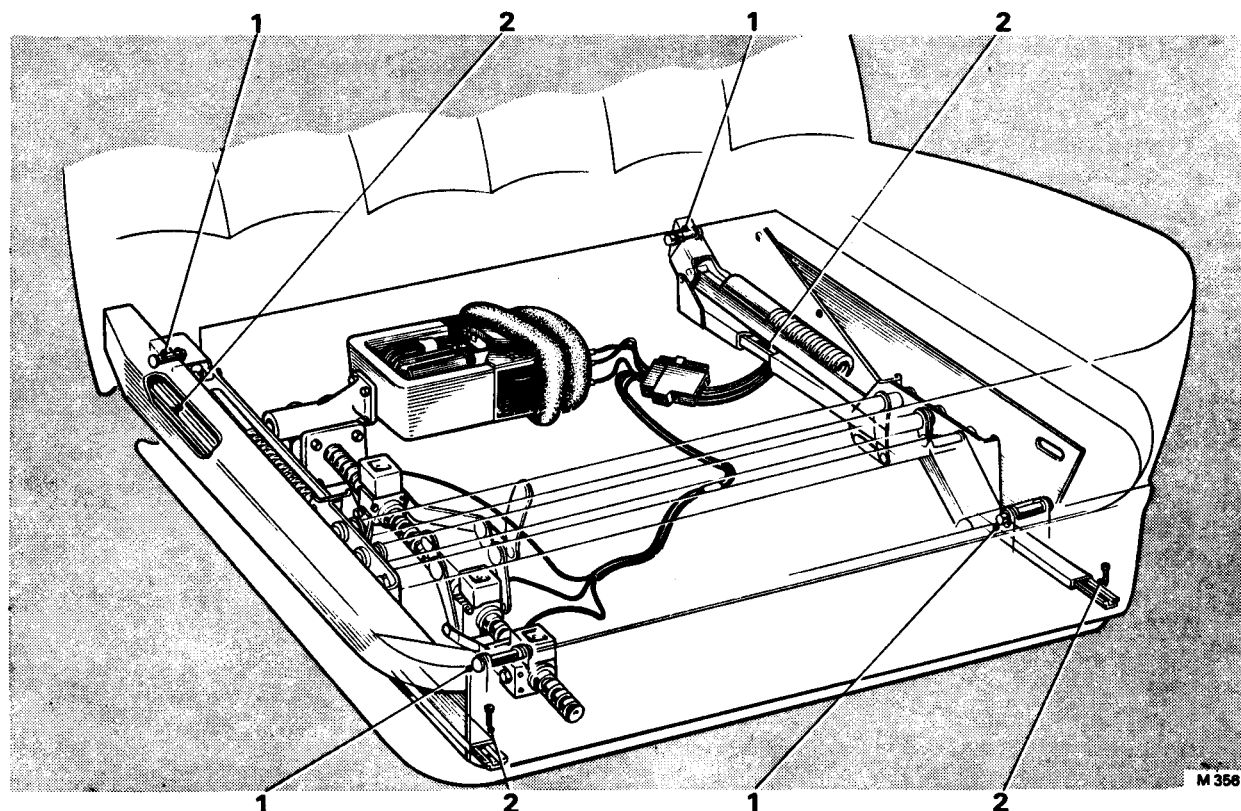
FRONT SEAT MECHANISM (4-Door Saloon and Long Wheelbase Cars prior to Car Serial Number 6001)
